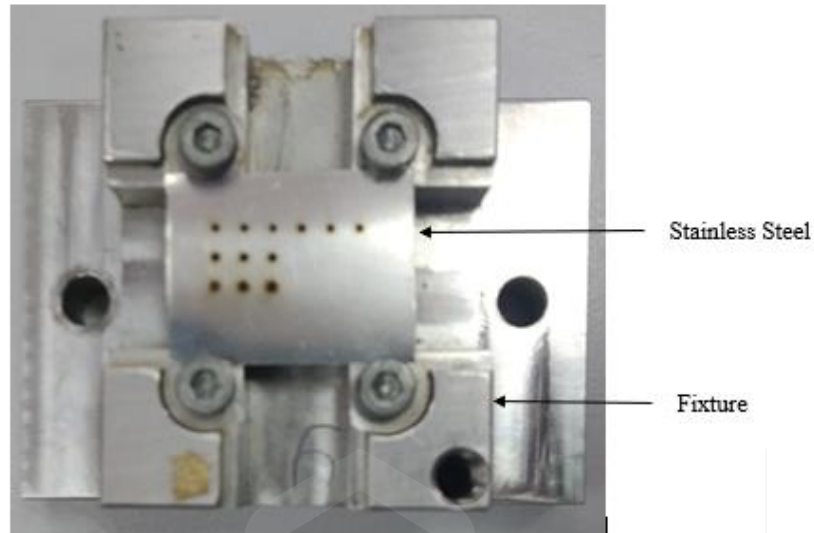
Workpiece and fixture used for hybrid micromachining process.
